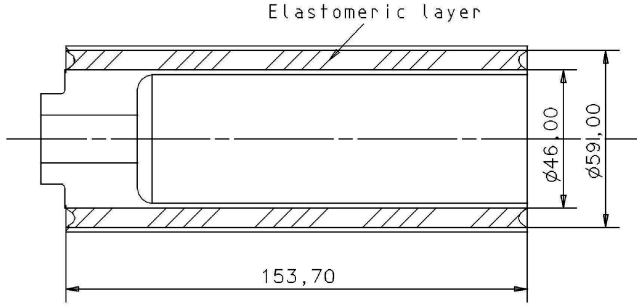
Cross section of concentric bearing elastomeric lag damper (dimensions in millimeters).
